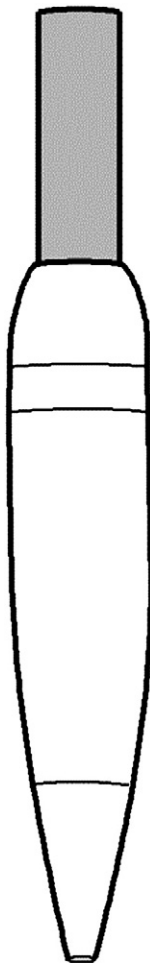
105 mm diameter artillery shell with steel tube assembly (shaded) welded in place.
